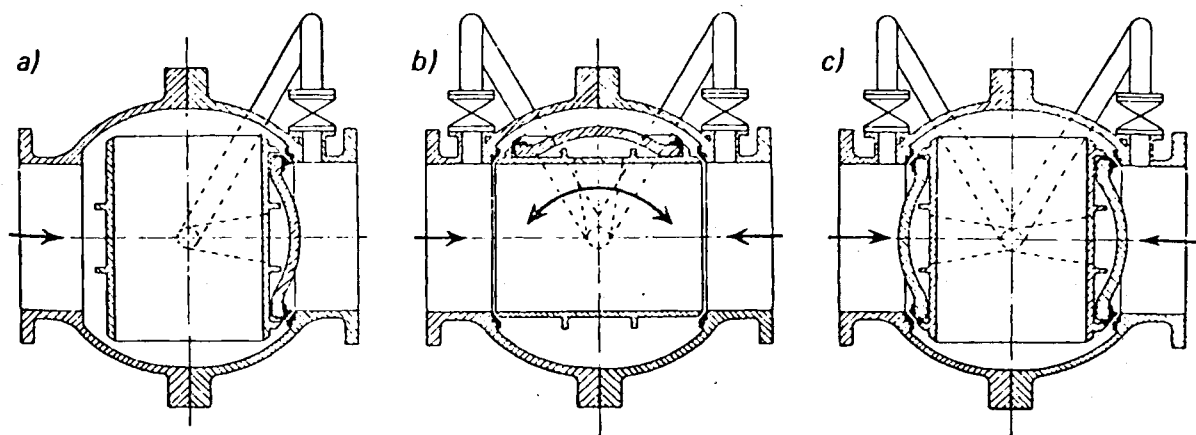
Spherical valve a) closed b) opened c) with additional revision seal. In a recent design the short stroke piston on the rotor is replaced by a pressure loaded elastic ring plate, clamped at its tip diameter (Drawing courtesy Sulzer Escher Wyss).
